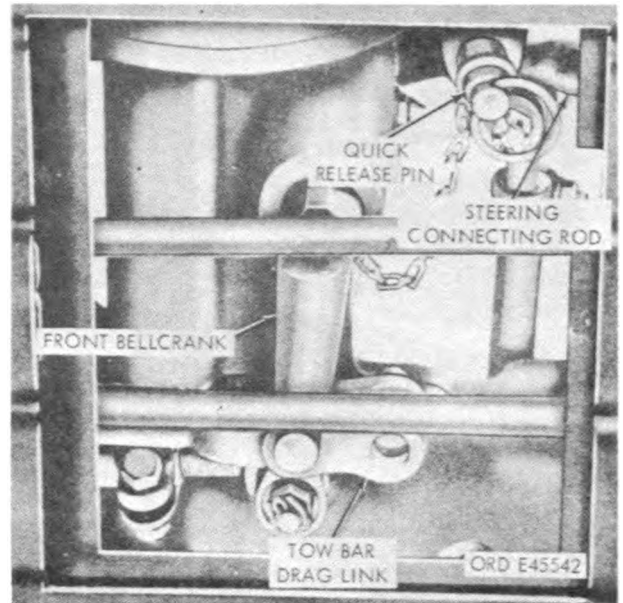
Steering access lid removed showing two-wheel steering connected.
